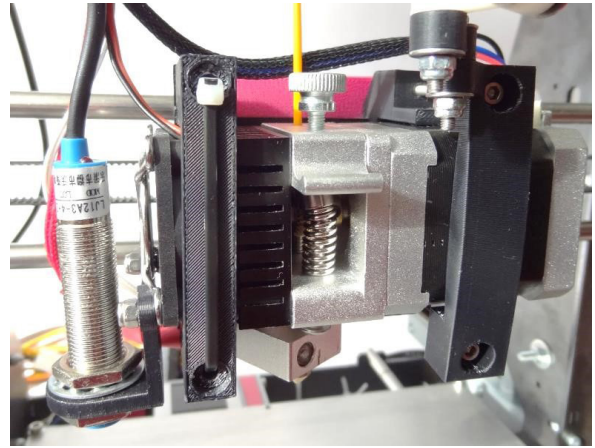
The complete MK8 extruder mounted with the use of printed parts [own elaboration]
